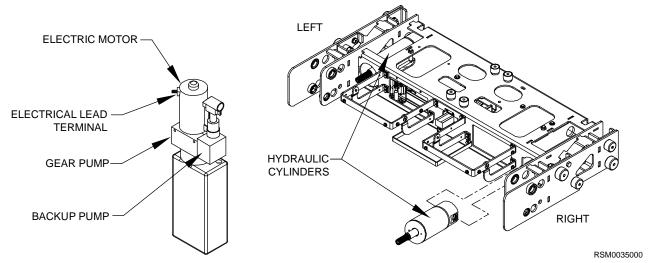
HYDRAULIC SYSTEM COMPONENTS
